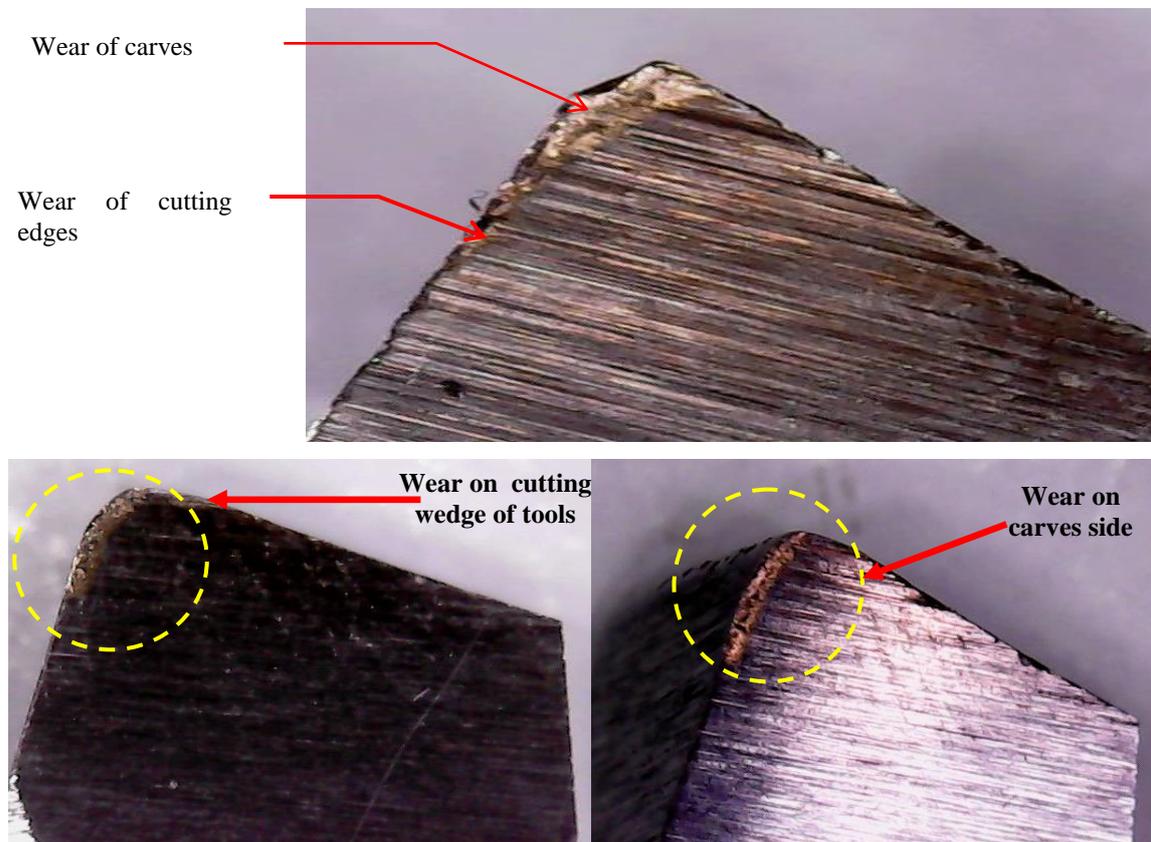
The wear positions on carving insert/cutting edge of CBN tool.
